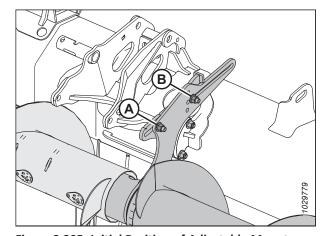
Initial Position of Adjustable Mounts – Three-Piece Auger
